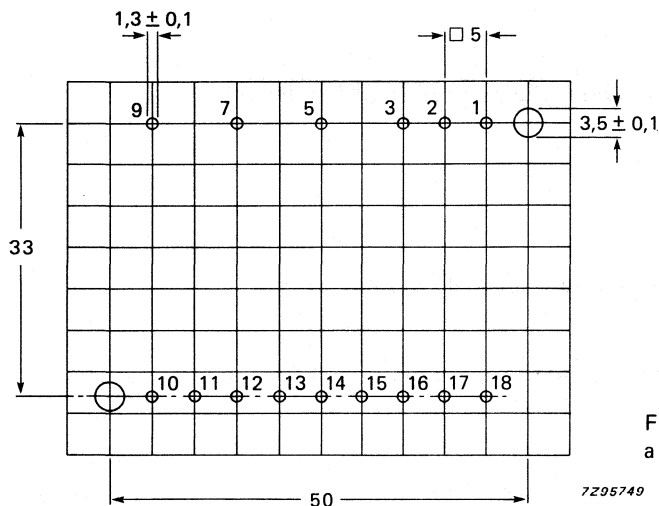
Hole pattern for mounting on a printed wiring board (solder side).
